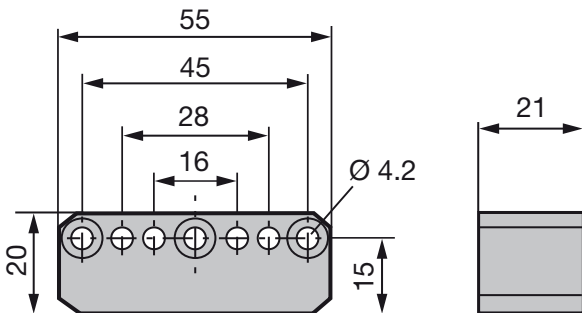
Installation dimensions of BTL5-P-5500-2 magnet
